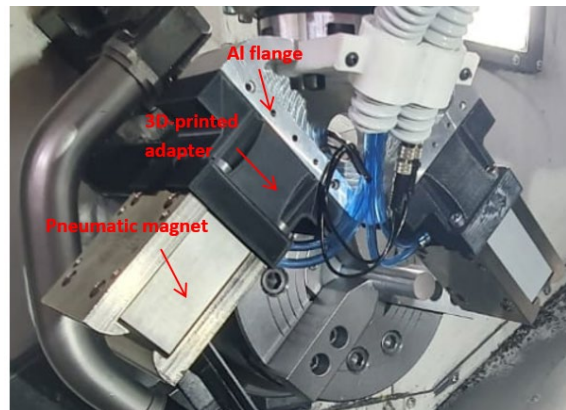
End-effector assembly: pneumatic magnets, adapters and aluminum flange
